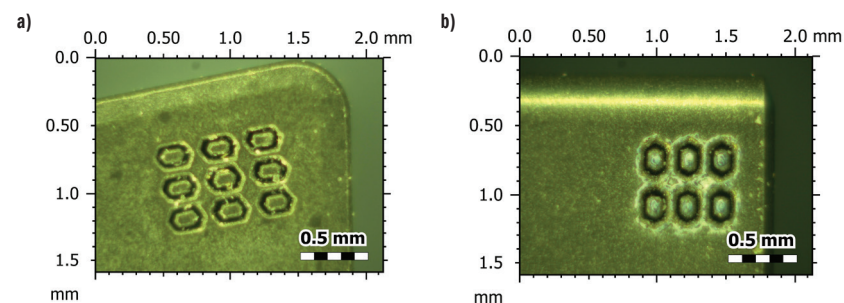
Micro-structure morphology of the tool; a) front face of cutting tool; and b) back face of cutting tool
